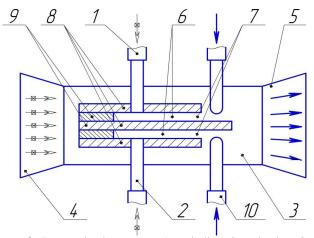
Pneumatic slot sprayer: 1 – air line; 2 – air pipe; 3 – body; 4 – confusor; 5 – diffusor; 6 – jet generator; 7 – nozzle; 8 – plate; 9 – gasket; 10 – feeding pipe.
